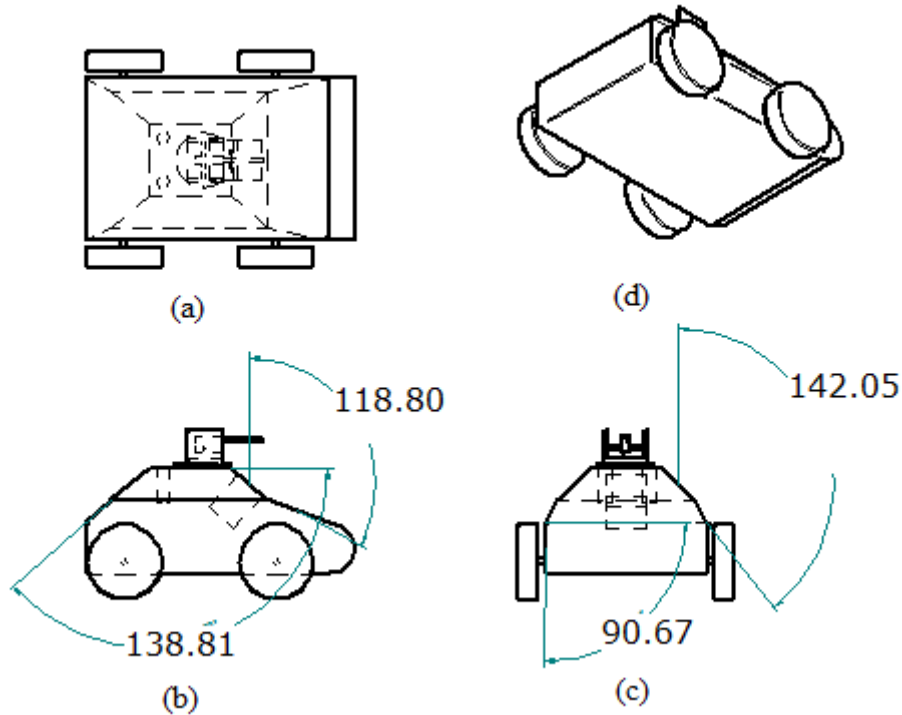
Orthographical Views of Anti-Riot Robot and Angles for Attack Deflection (a) top view (b) right side view (c) front side view (d) complete view
